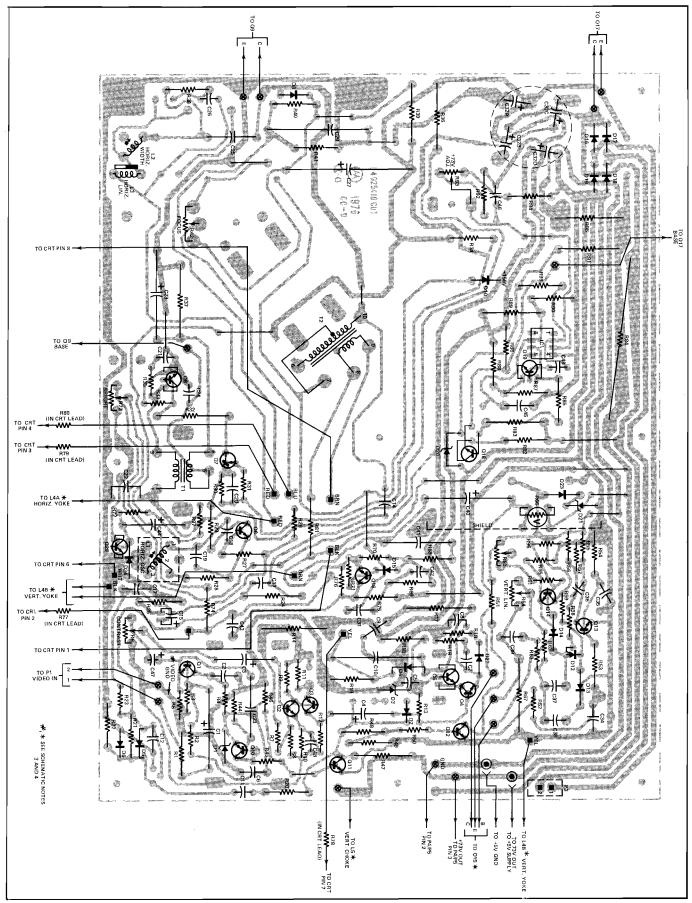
Motorola Monitor Circuit Board Detail—Solder View
